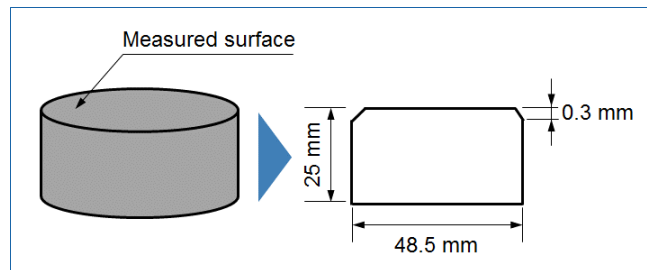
Shape and dimensions of the workpiece used for the tests.
